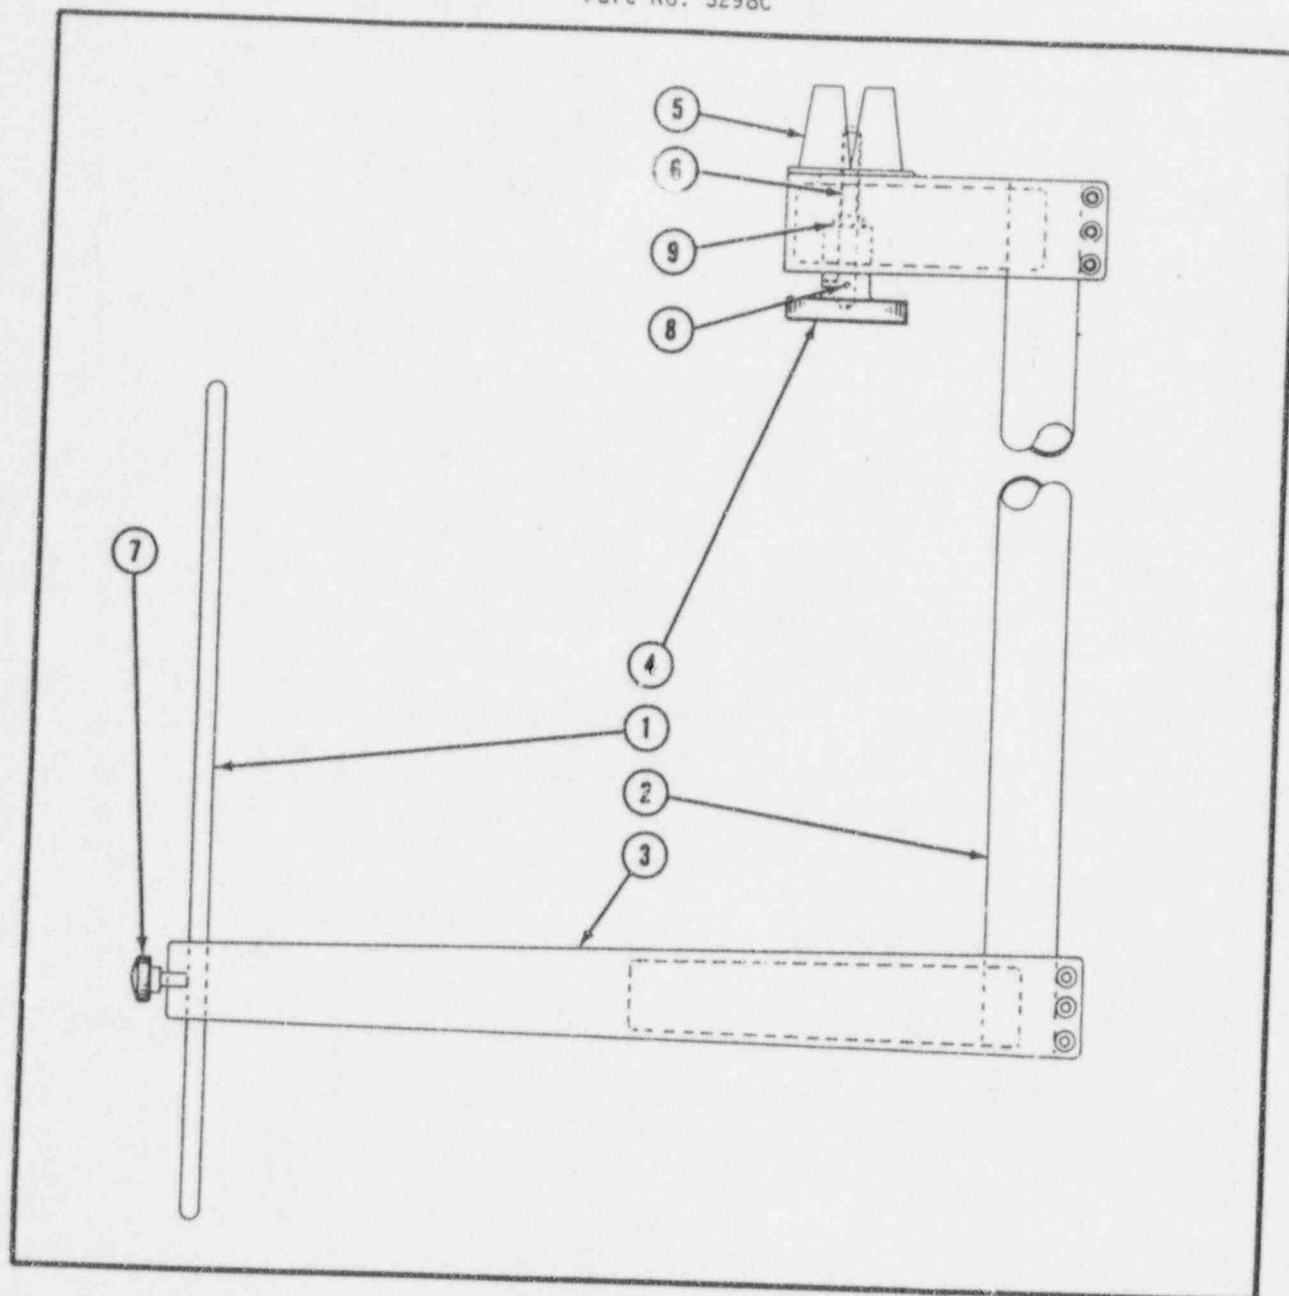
COBALT, BACKPOINTER ASSEMBLY
